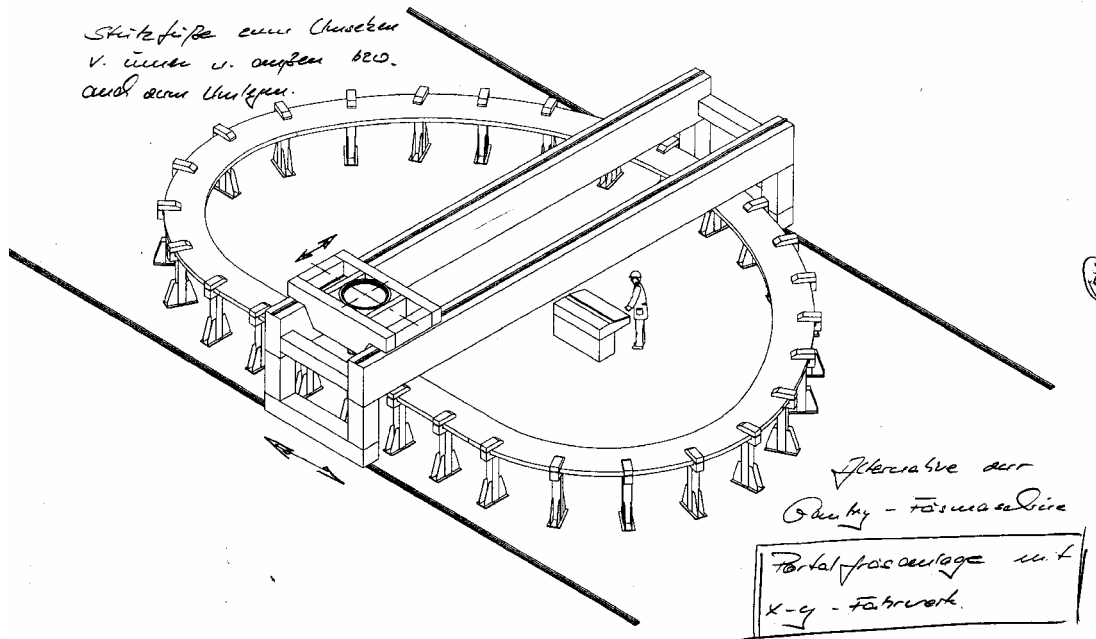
Milling of a radial plate on a large Gentry milling machine.
